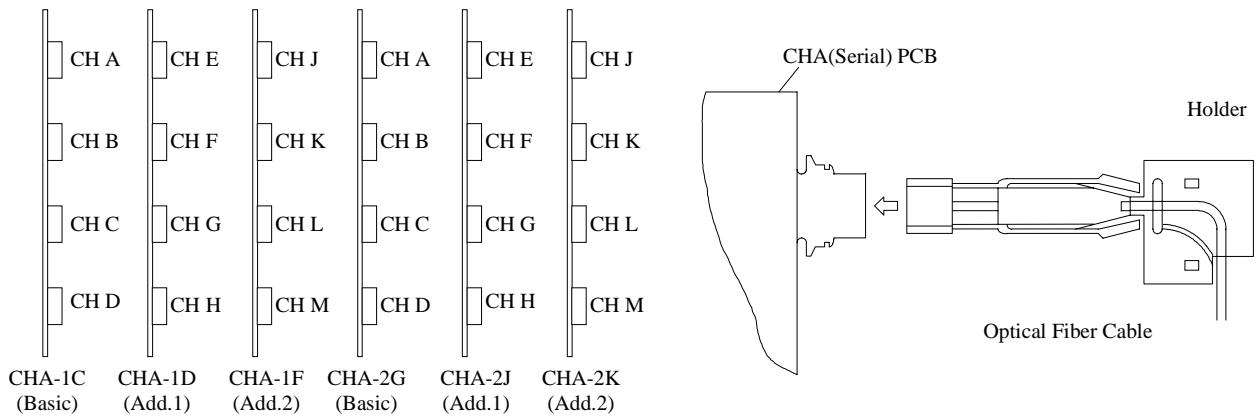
Connection of Optical Fiber Cable
